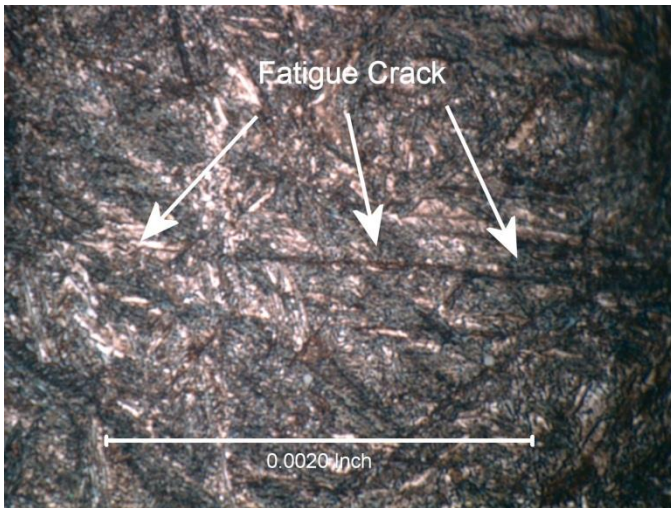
1500X Fatigue Crack in Gear
